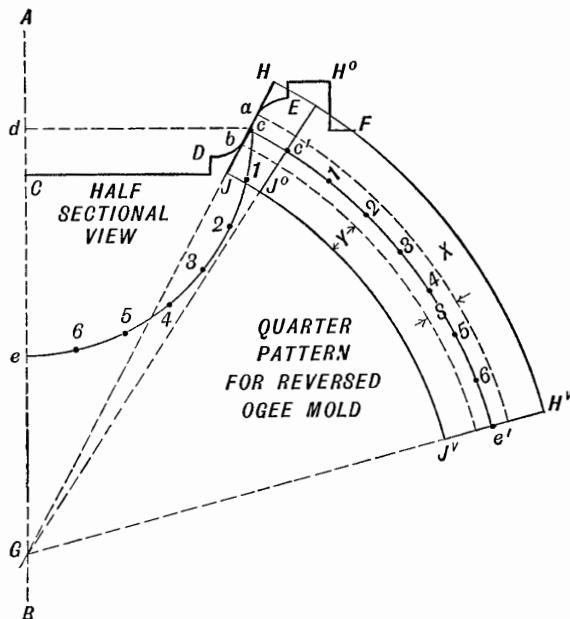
Pattern for Reversed Ogee Mold in a Circular Panel
